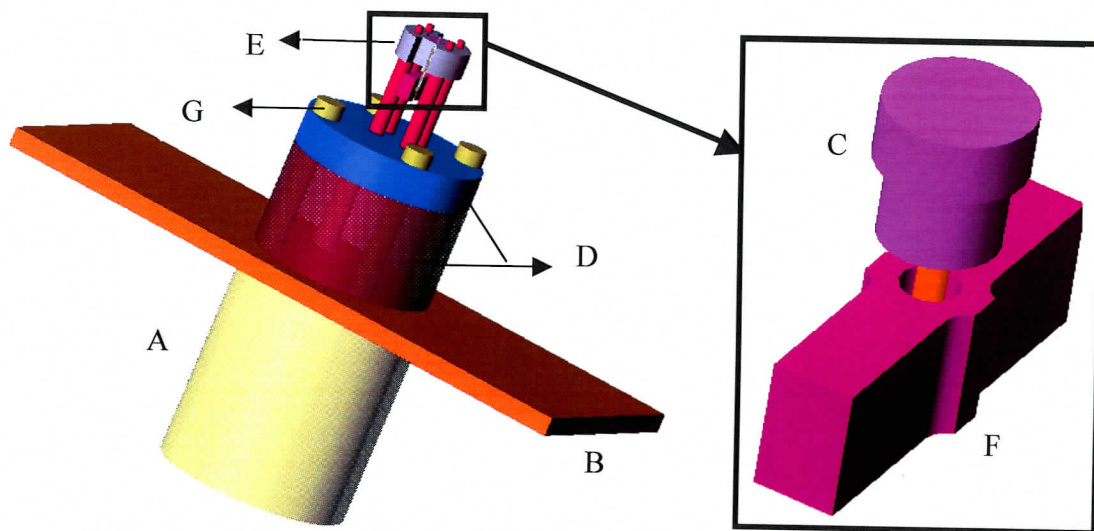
Impact Tensile Fixture Setup For The Environmental Chamber
